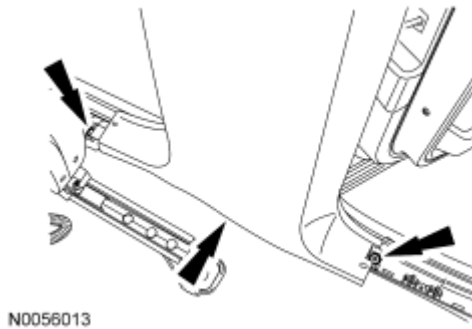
Identifying Clips & Lower B-Pillar Trim Panel
